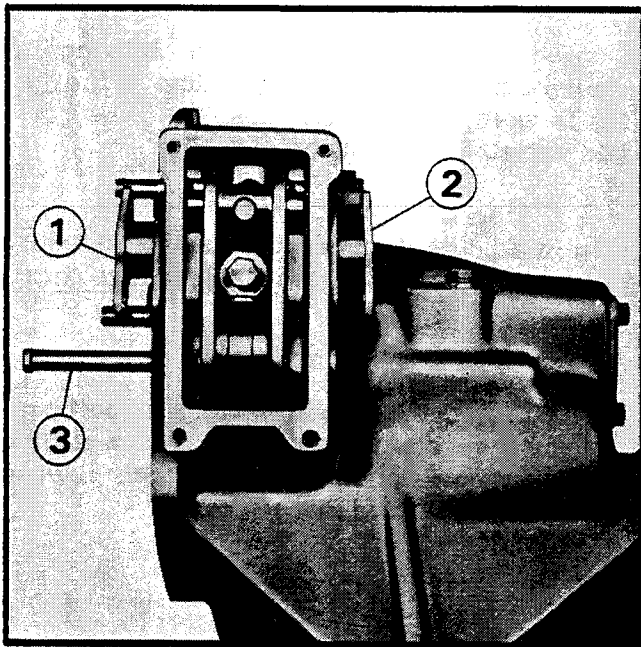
REMOVING BELCRANK SUPPORTS AND PIVOT PIN
